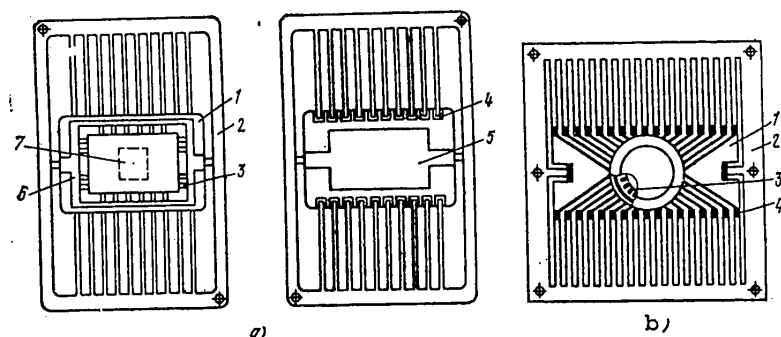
Designs of Flat Rectangular (a) and Round (b) Cermet Housings with 24 Leads: 1--ceramic body of housing; 2--lead frame; 3--internal contact surfaces; 4--metal-coated leads of housing; 5--metal base of housing (bottom); 6--metal-coating molding for sealing; 7--recess for crystal
